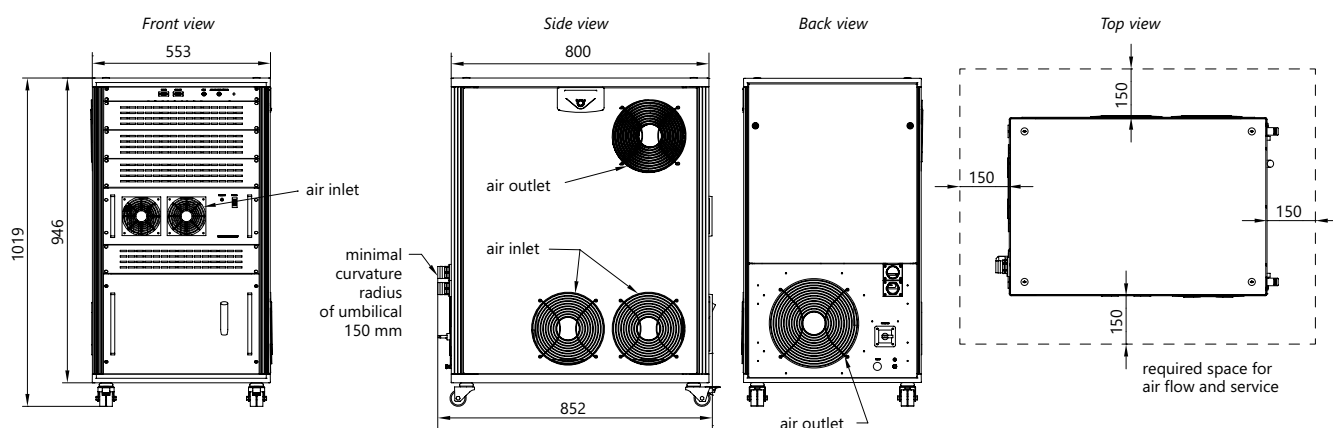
Outline drawings of Atlantic 25, 50, 80 power supply unit (dimensions in mm)
